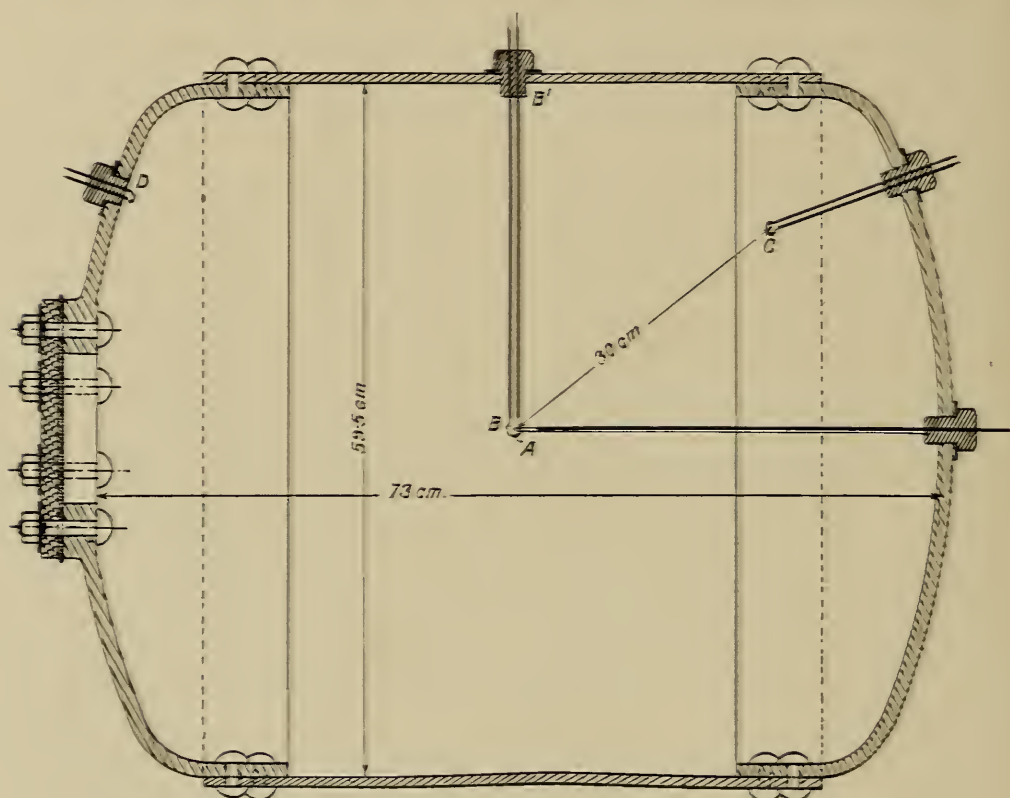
Professor Hopkinson's Gas Explosion Apparatus.
